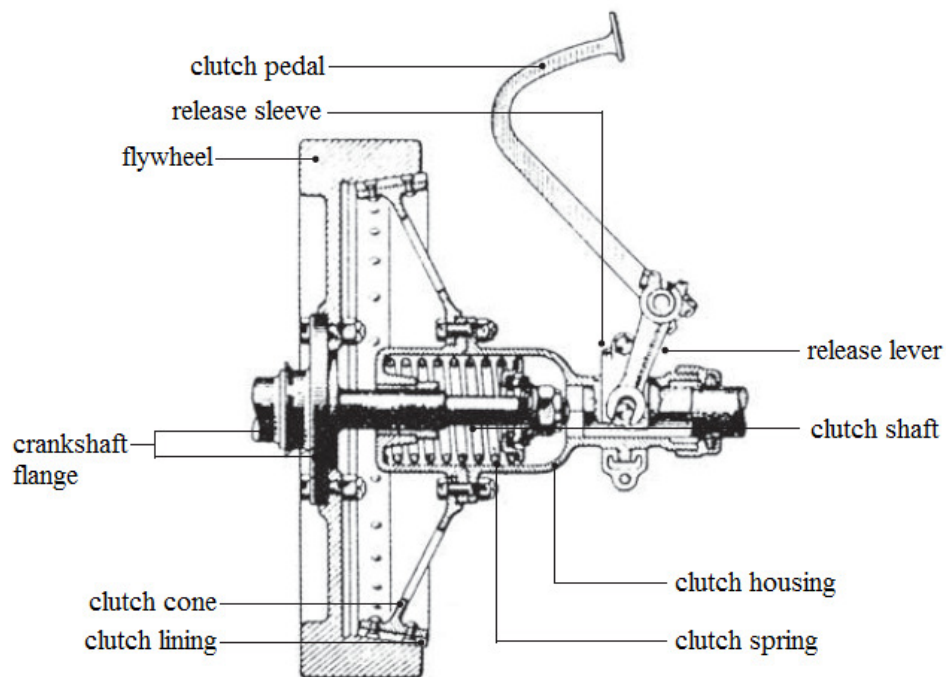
Professor Hele-Shaw's clutch [9].
